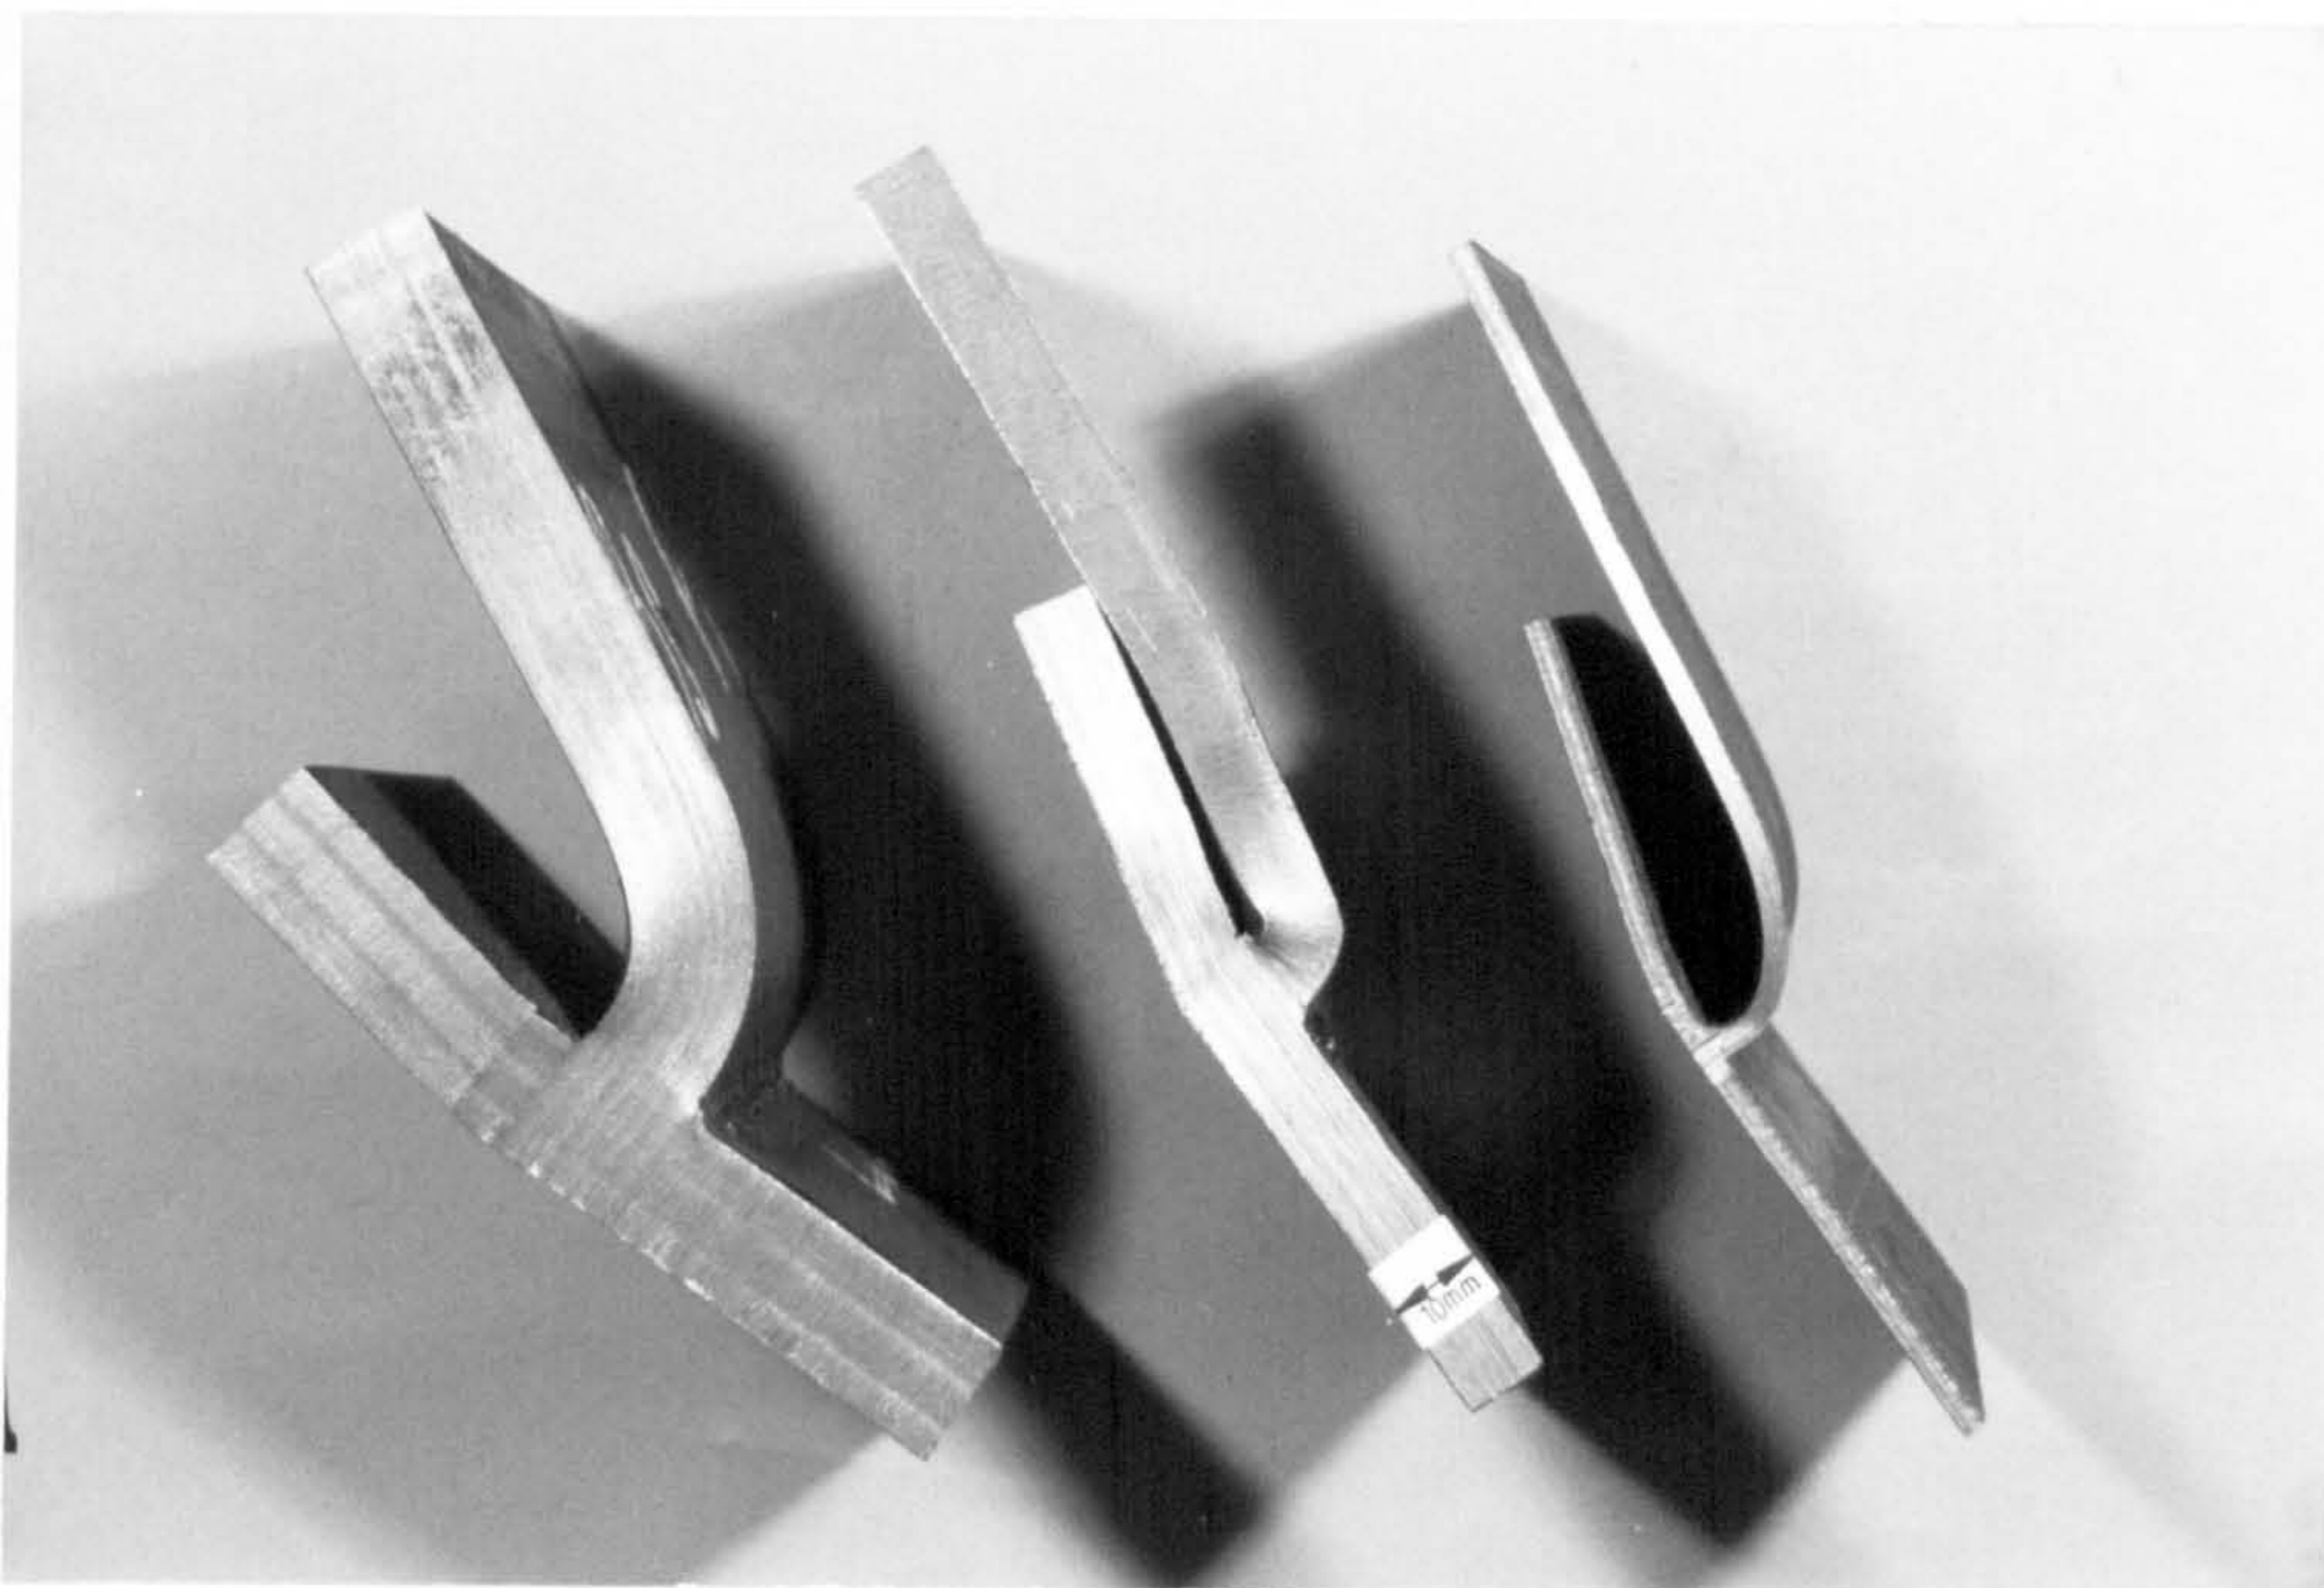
Acceptable skid welds after a fillet fracture type test
